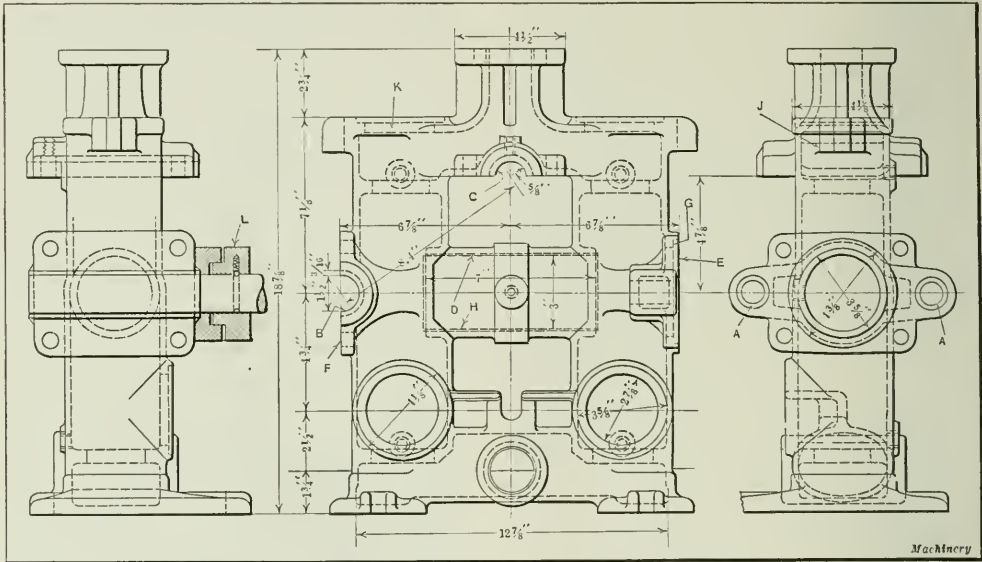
Detailed Views of Cylinder Casting for Double-acting Pump
